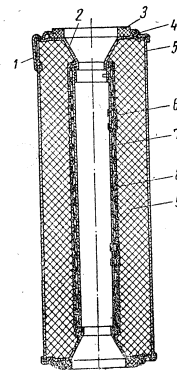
The Filtering Packing and Winding of the Fine Oil Filter: 1—clamps; 2—filler; 3—gasket; 4—cover; 5—housing; 6—clips; 7—frame; 8—cloth winding; 9—packing.
